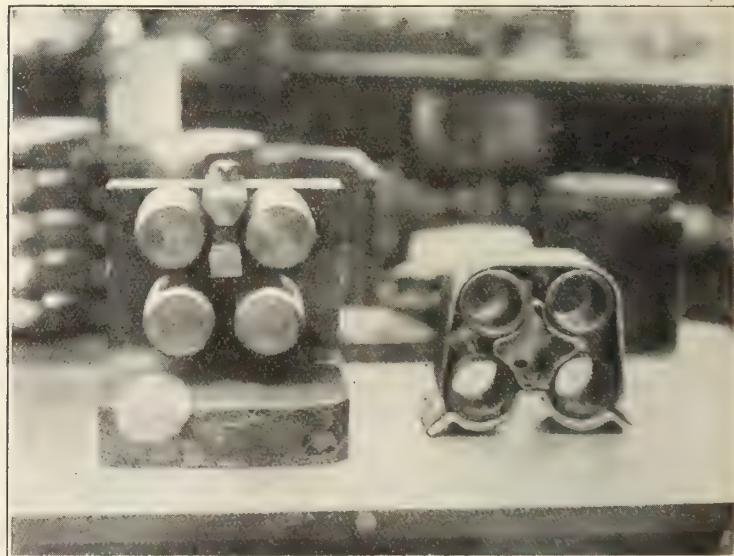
Jig for Drilling Superheater Tube Clips, With an Assembled Clip.
